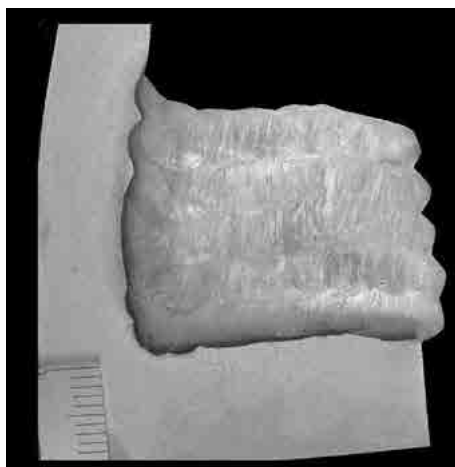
Macrostructure of overlay weld made with MIG method and electrode wire NiCro 60/20 on steel AISI 8630M, etching with Adler's reagent
